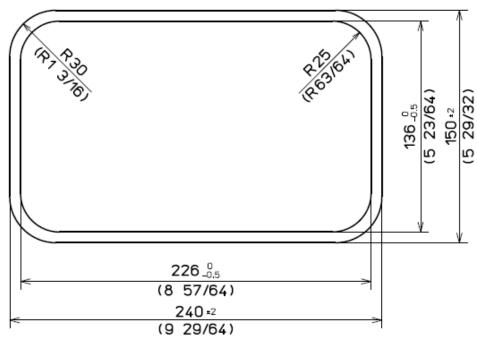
Outline dimensions of a transducer (TD-754)
